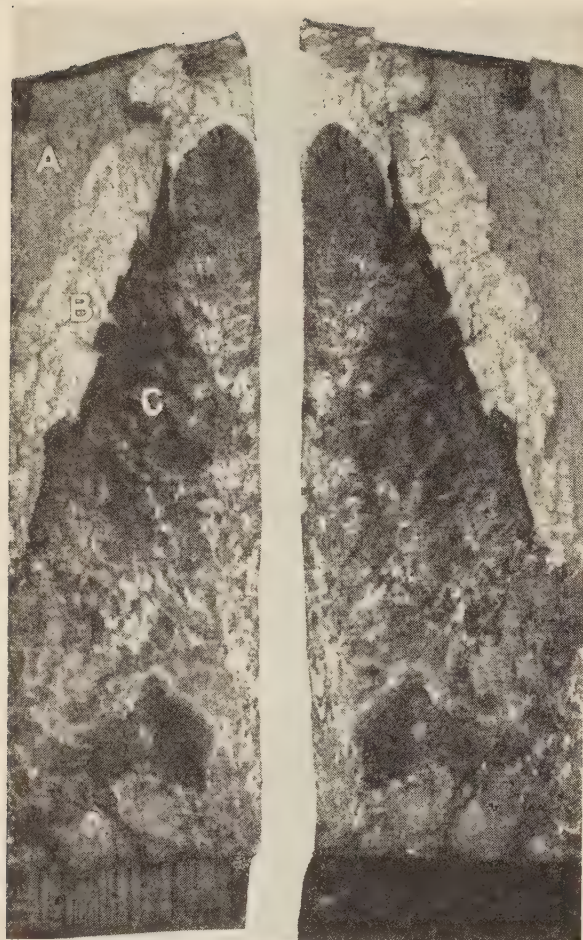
FRACTURED FACES OF A PARTLY CRACKED BOILER PLATE (A shows a zone of seemingly normal, ductile metal farthest removed from the source of attack; B is a zone of hydrogen-embrittled metal preceding C, which is a zone of direct chemical attack, progressing into the original crack and into the intergranular voids opened by the hydrogen attack. $\times 2$.)
